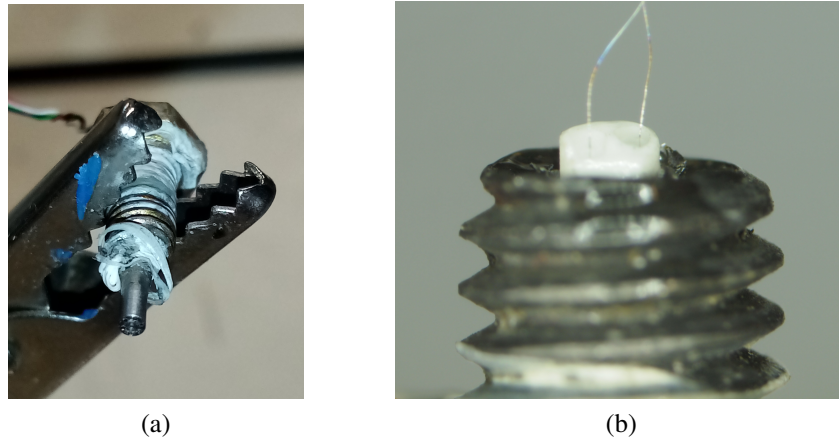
(a) Pressure sensor passing through the screw, (b) Thermocouple passing through a ceramic tube fixed inside a screw
